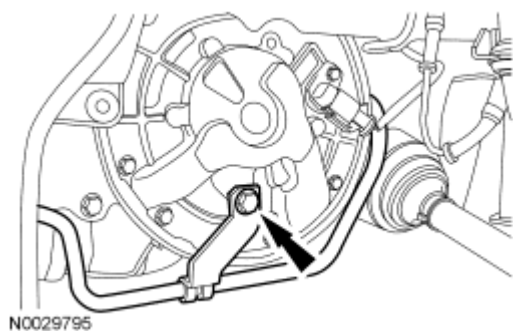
Locating Transmission Fluid Cooler Tube Bracket Bolt
